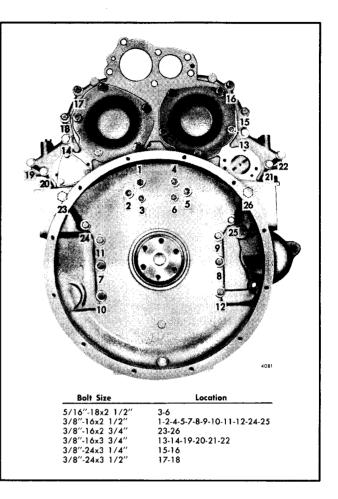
Flywheel Housing Bolt Sizes and Tightening Sequence (Operation 1)--6V Engine
